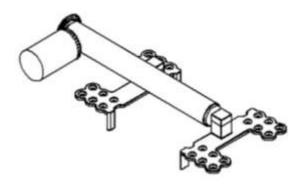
Drawing of cranial distraction device with lead screw mechanism without gear enclosure
